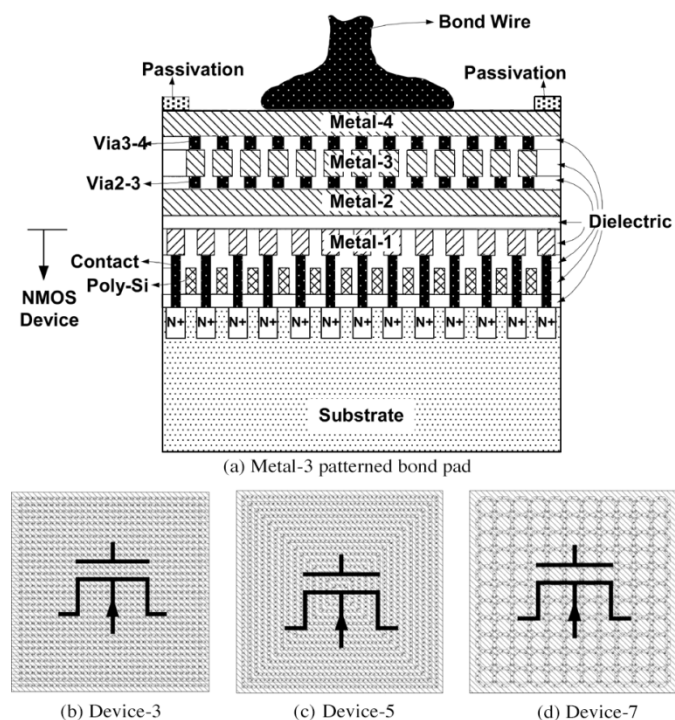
Layout designs of the third design group. (a) Cross-sectional view of the bond pad structure with patterned Metal-3 and a NMOS transistor under Metal-2, and (b)–(d) show the pads realized with different patterned Metal-3 layout styles for Device-3, Device-5, and Device-7, respectively.
